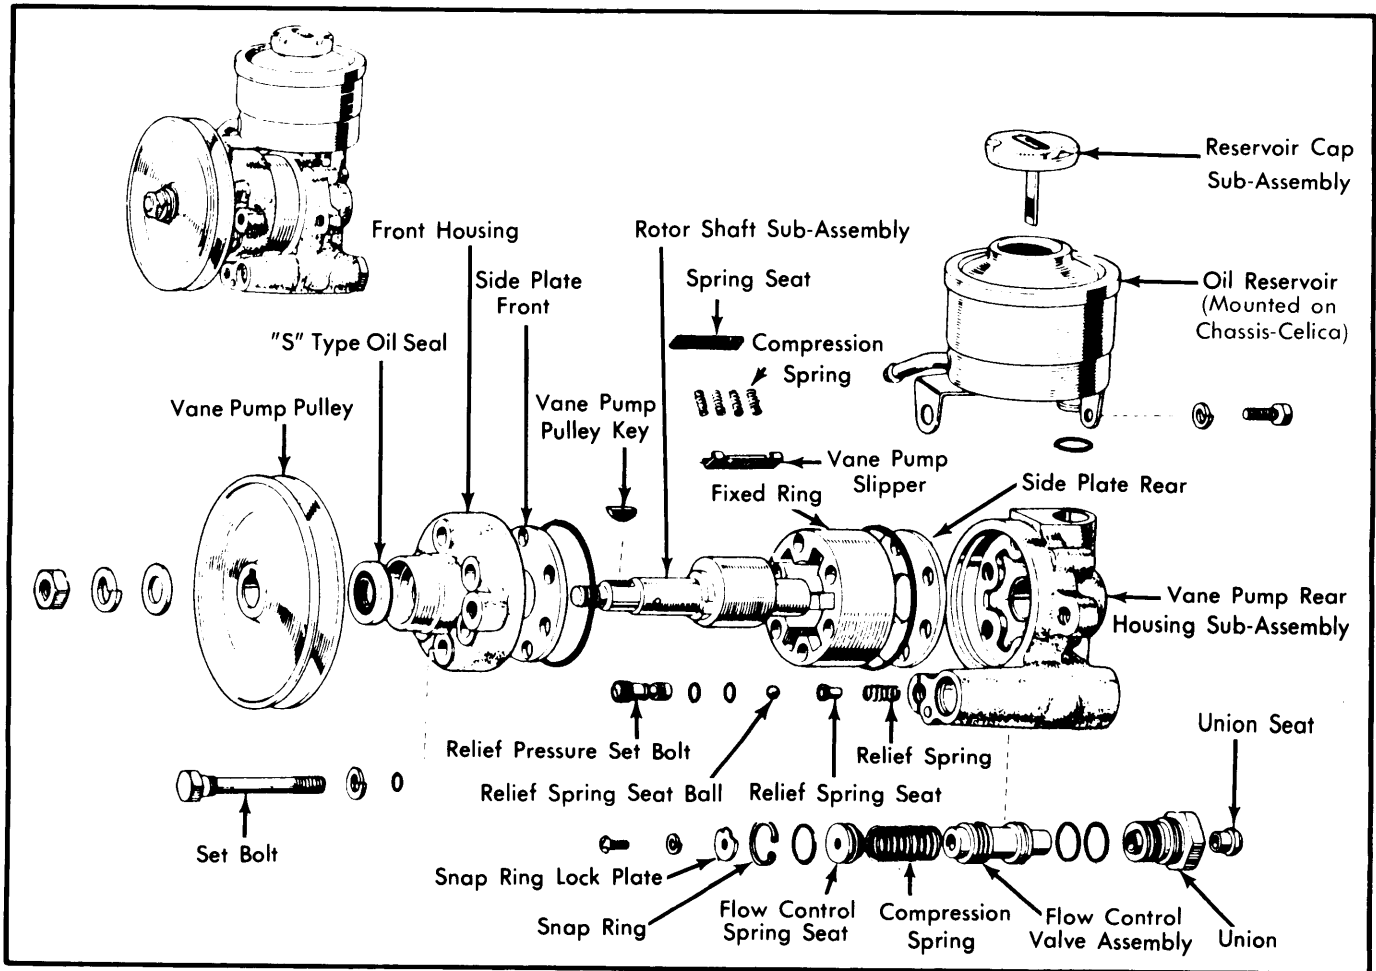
Exploded View of Toyota Power Steering Pump Assembly
